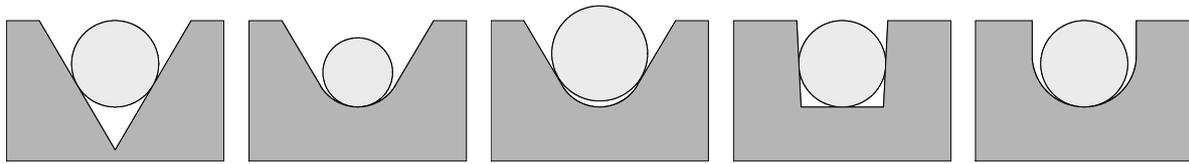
String bearing: V-shape, threaded groove (w/light & heavy string), notch bearing, rounded bearing.
